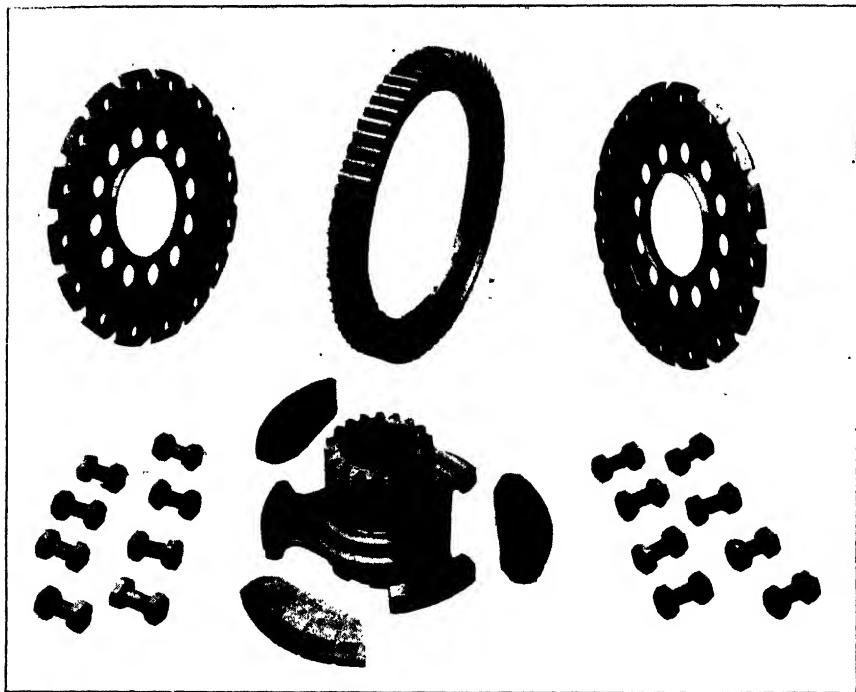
Supercharger Clutch Drive—Dismantled.
